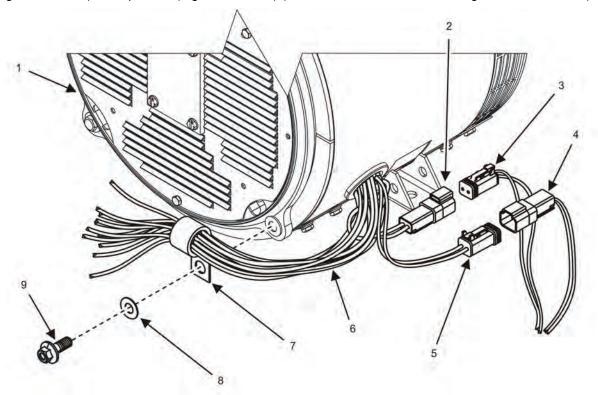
50/60 Hz AC Generator Wiring — Removal.
